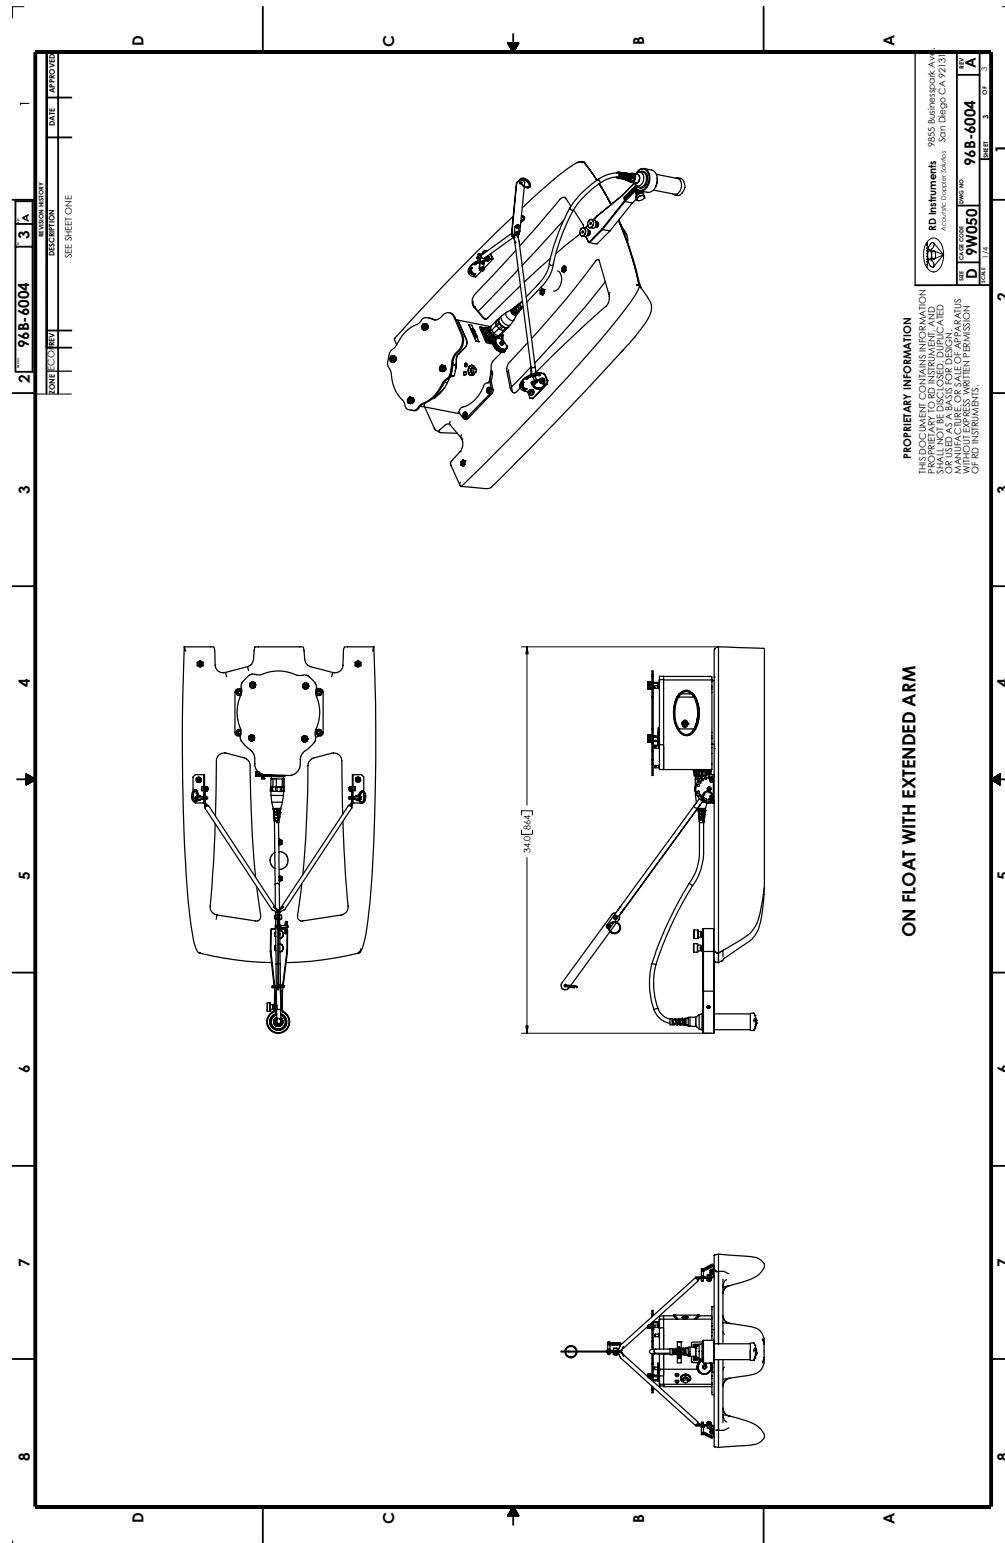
Outline Installation Drawing – Sheet 3 of 3
